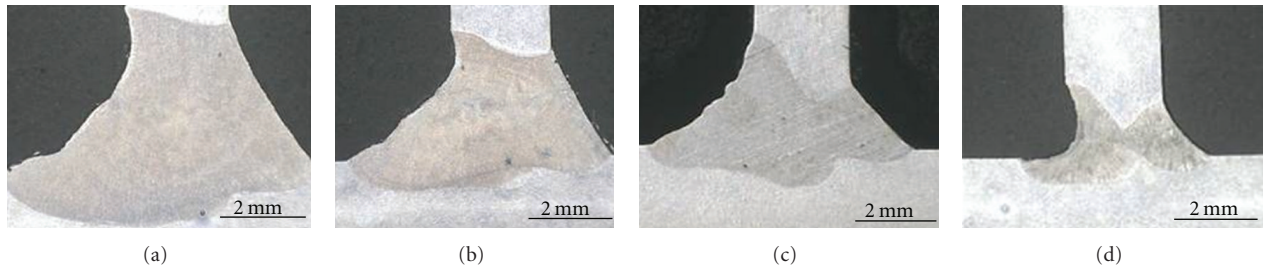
Macrographs of the weld seams obtained at different welding speed (fixed welding parameter: $P_{CO_2} = 7.8 \text{ kW}$). (a) 2 m/min, (b) 3 m/min (c) 4 m/min, (d) and 6 m/min.
